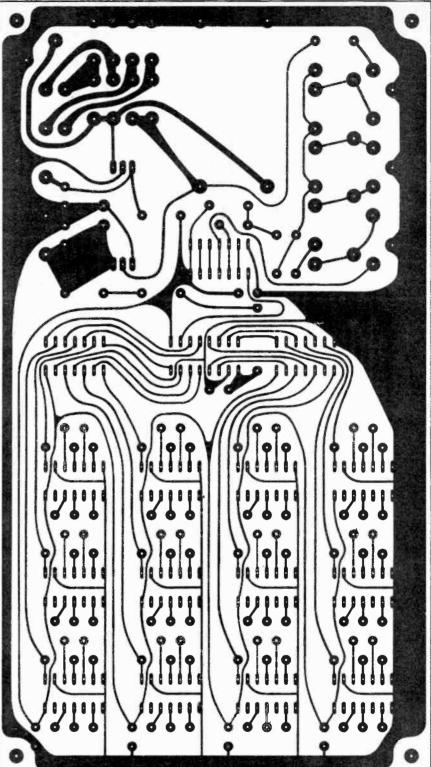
Printed circuit layout of P.S.U./Tone Generator p.c.b.
